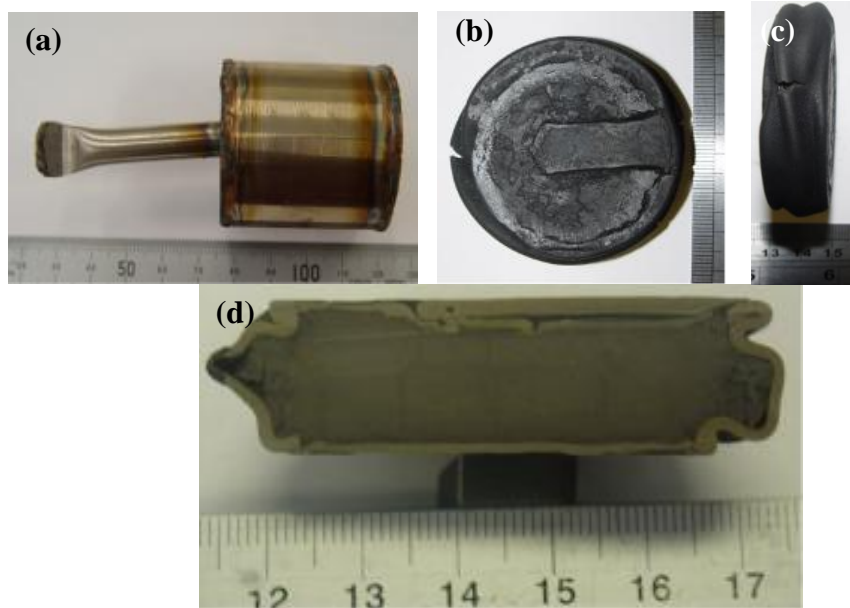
Canned compact (a). Before forging (b), (c) after forging and (d) cross section of the bulk alloy produced after powder compact forging.
